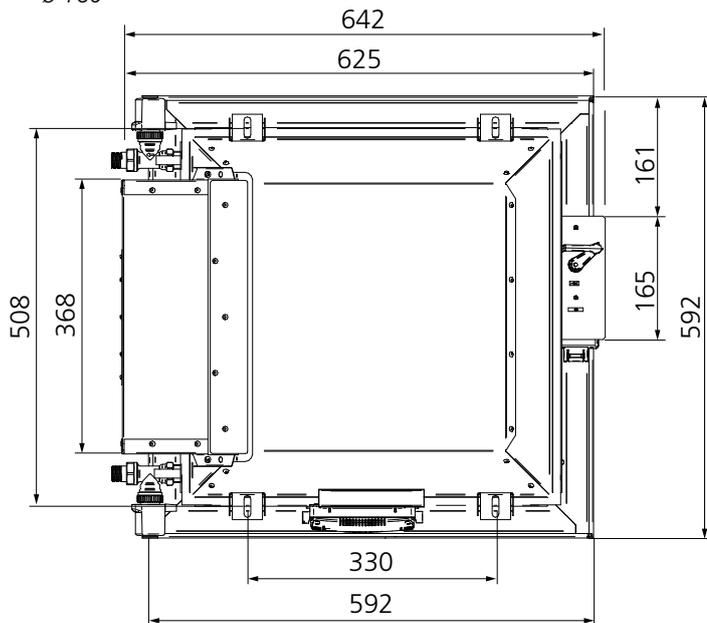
Dimensional drawing, view from above. Air connection on the short side.
